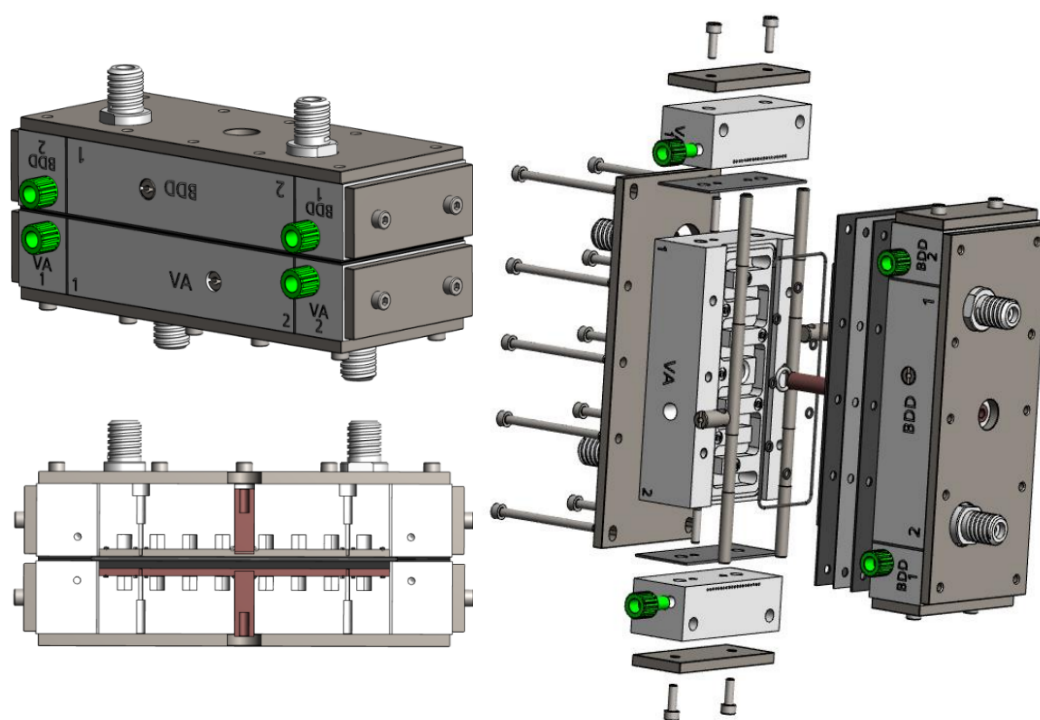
Views of assembled flow-electrolysis cell and partly exploded drawing of the full-featured 4x12 cm² cathodic area flow cell.⁶
